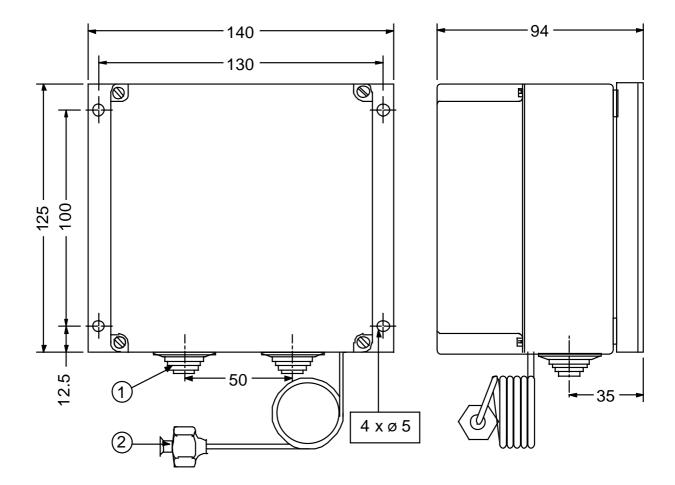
Style 50 (incl. valve depressor mounted into machined flare)
